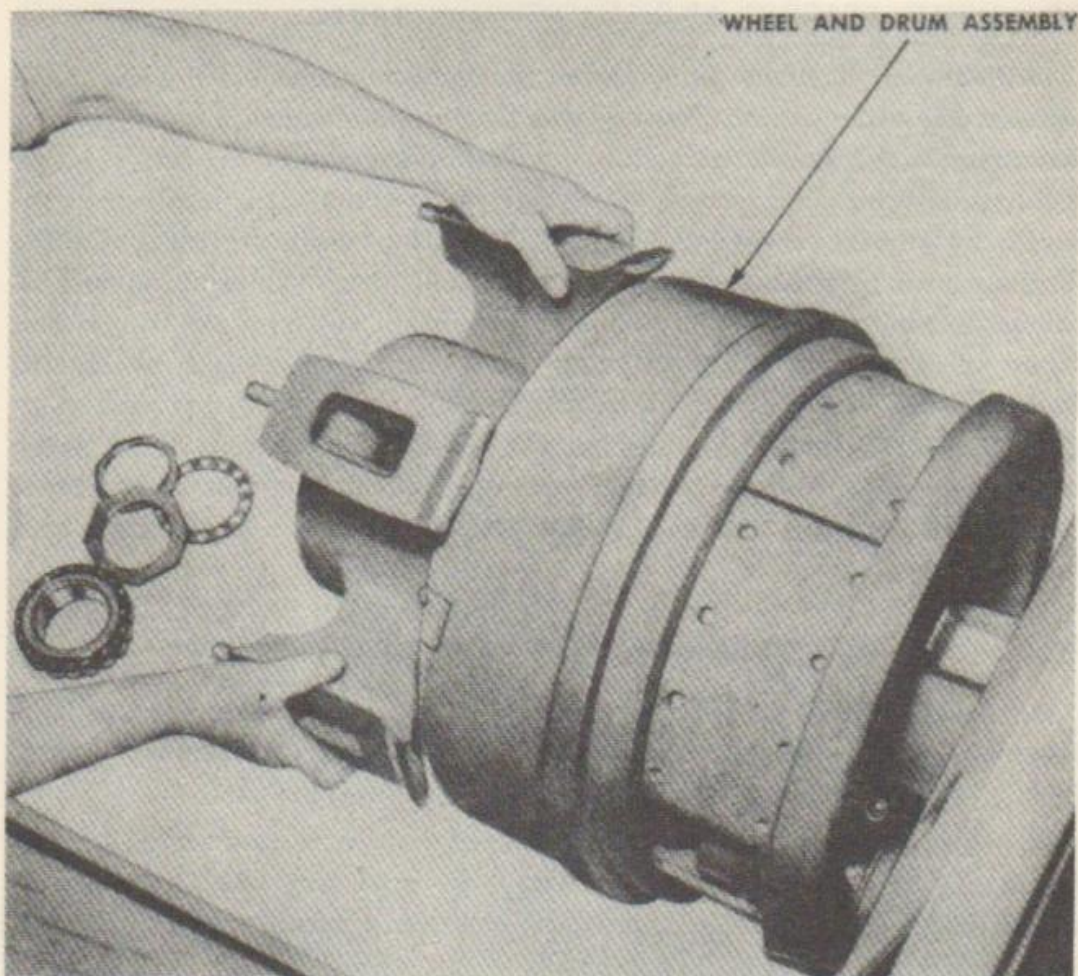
REMOVING WHEEL AND DRUM ASSEMBLY—SEMITRAILER
